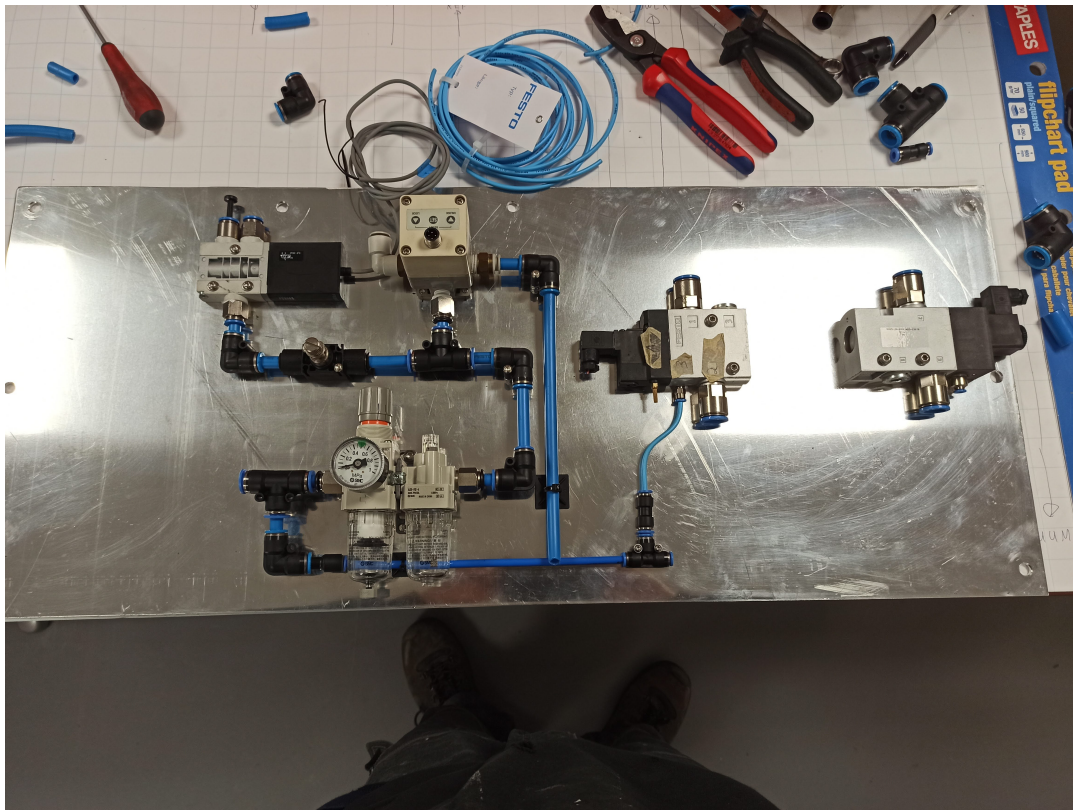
Mounting plate during initial layout and routing of the pneumatic system
